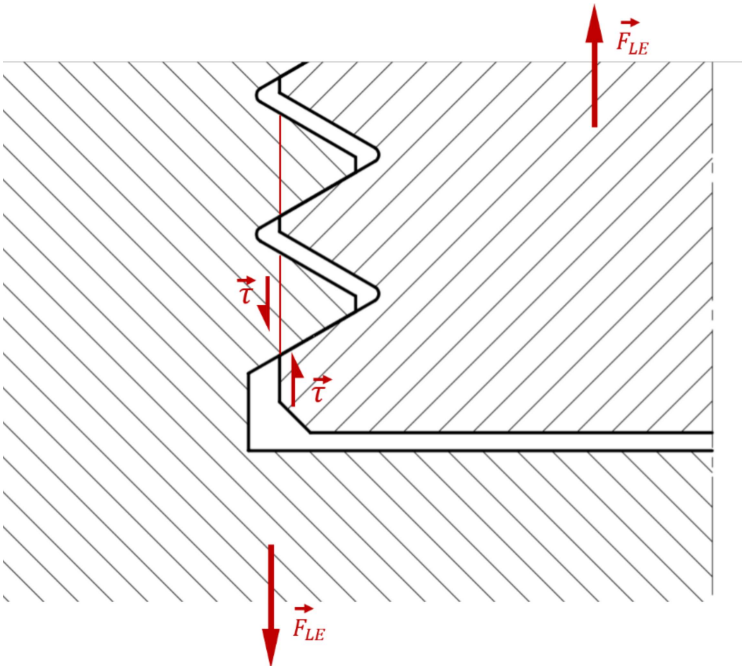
Shear Stress in the Thread Fillets for the Lifting Eye Bolted Connection
